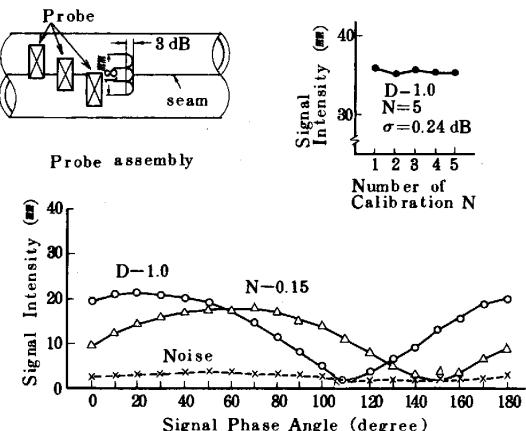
Probe assembly &amp; Detection of reference defect by 4" ON ECT
